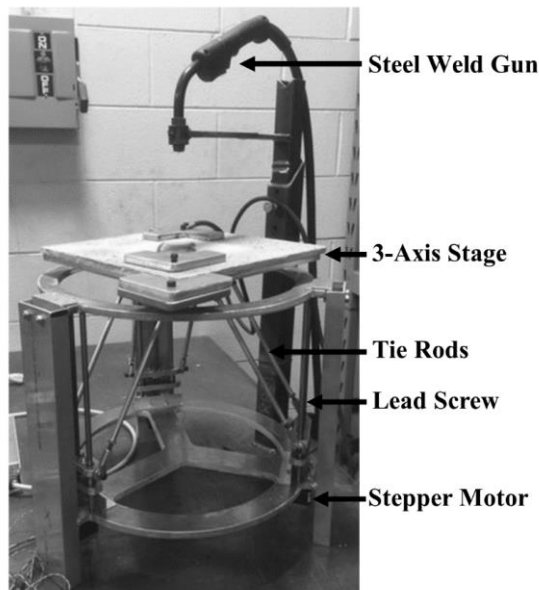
Labeled photograph of the GMAW-based metal 3-D printer shown with the M-100 weld gun for steel printing
